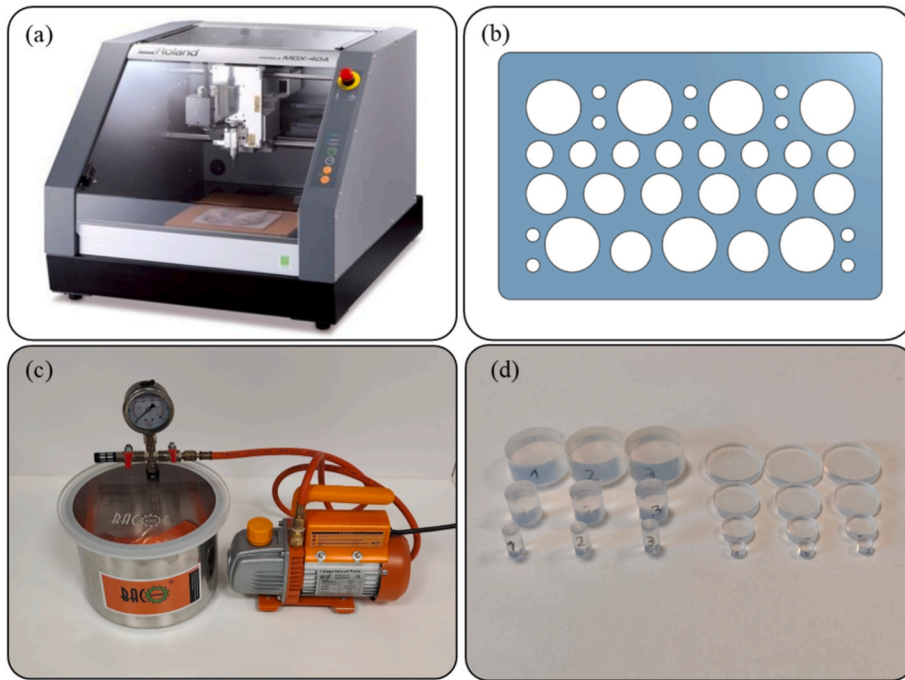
Equipment and materials used for the preparation of silicone rubber samples: (a) ROLAND MDX-40A 3D milling machine; (b) 3D model of the molds; (c) vacuum chamber and pump and (d) 21 silicone rubber samples of various sizes tested throughout this work.
